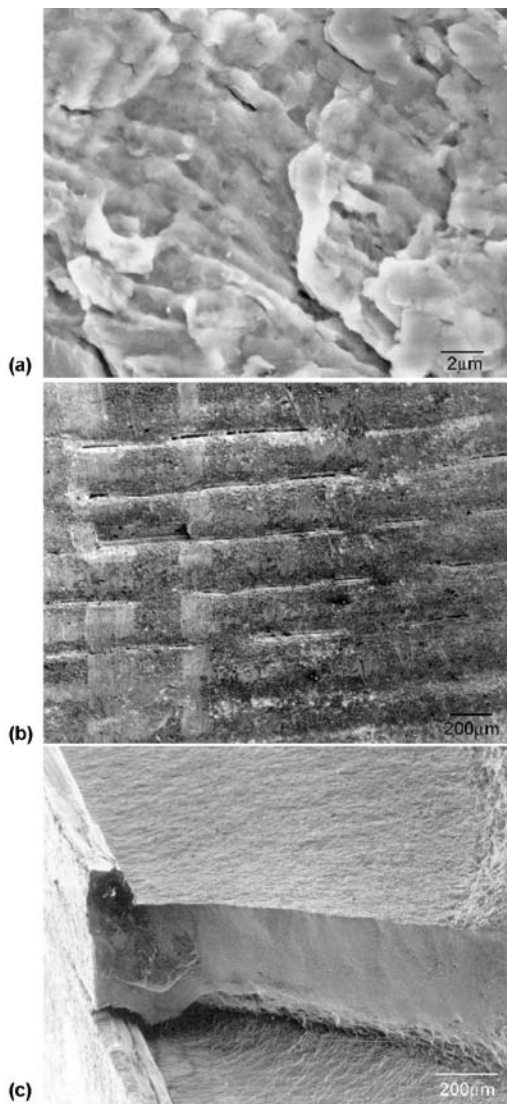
SEM examination of the fracture surface. (a) Fatigue striations emanating from the fracture origin. (b) Machining marks found on the surface of the inner bore. (c) Well-defined layer showing fatigue emanating from the damaged material at the surface of the inner bore
